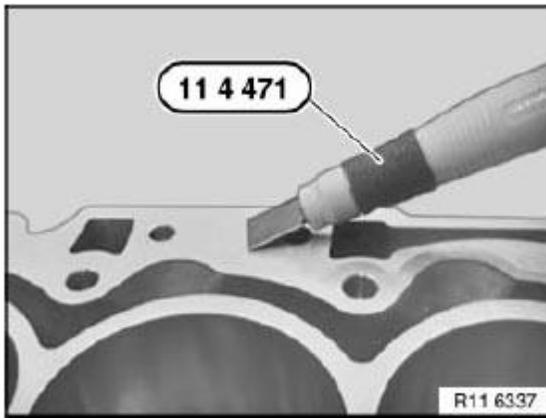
Remove Coarse Residues On Sealing Surfaces Using Special Tool 11 4 471
